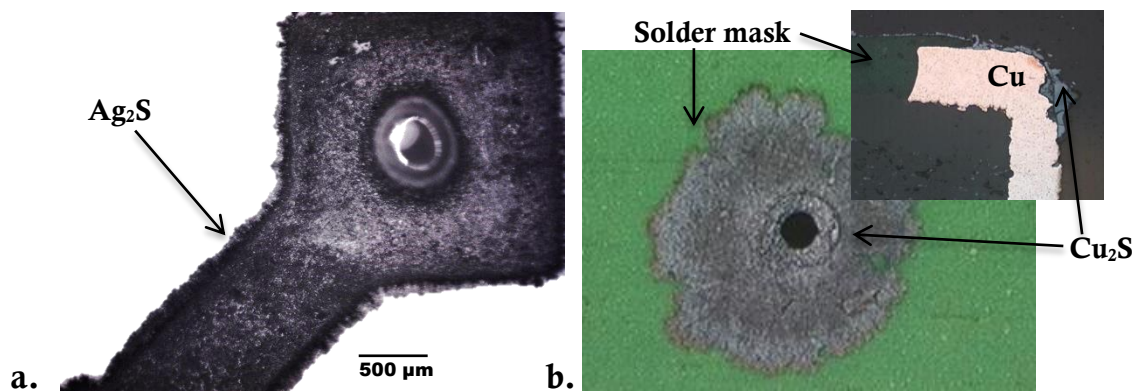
Examples of creep corrosion: a. Ag corrosion in H_2S environment, b. Cu corrosion (OSP surface finish) [122]
